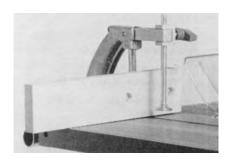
The standard miter gauge extension provides extra support when crosscutting.
